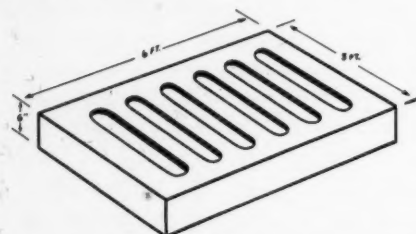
Example of cheap pattern construction that defeated its own purpose. Patterns were for cast iron dies, to have smooth faces to be used "as cast" without further machining, and were made of $\frac{1}{4}$ in. plywood. Core boxes were $2\frac{1}{2}$ in. deep, made of 1 in. nailed lumber. At insistence of customer, patterns were used, but the dies cast required further costly machining. Patterns should have been of at least 1 in. material properly braced, core boxes (as illustrated) approximately 6 in. deep of 2 in. material with 2x3 in. battens.
